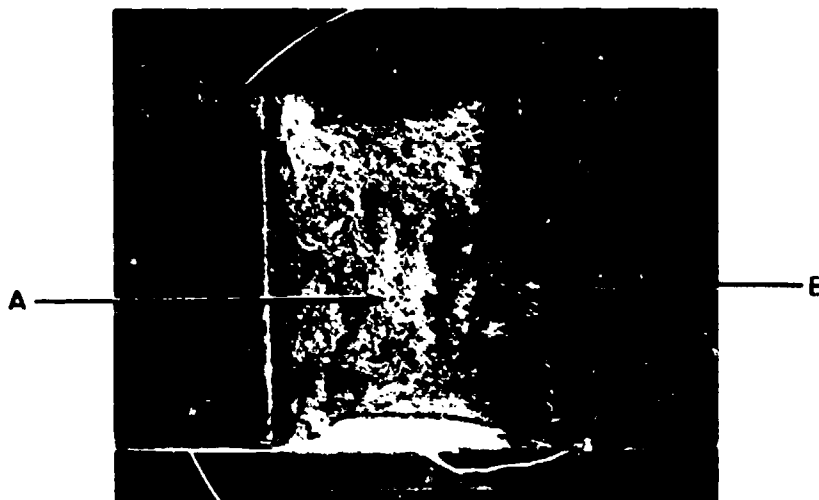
Fracture surface of a temper-embrittled A-514 plate fatigue specimen, 10x.
